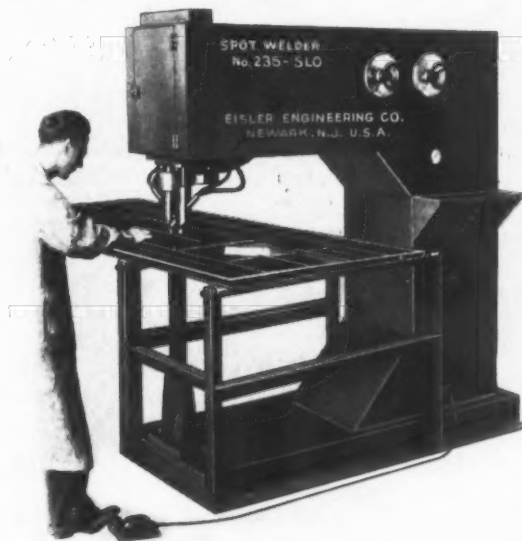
Eisler Spot-welder for Materials that are
